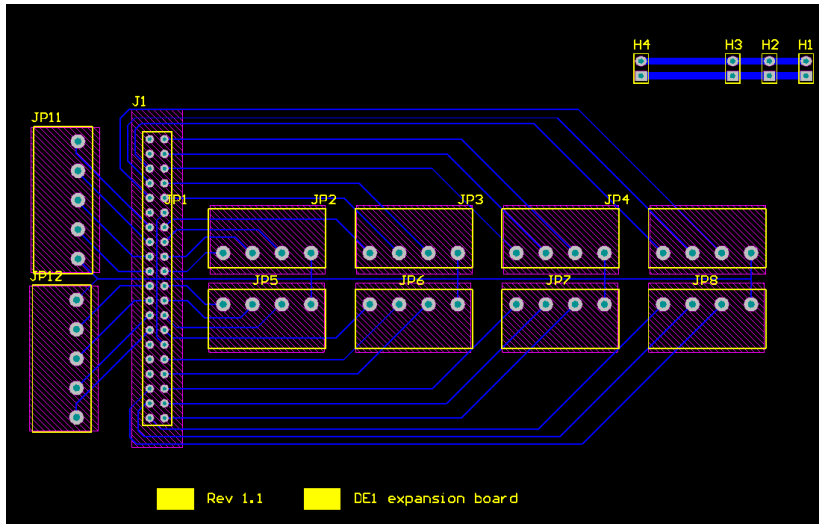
PCB layout of 40-pin expansion board created using Altium Designer
